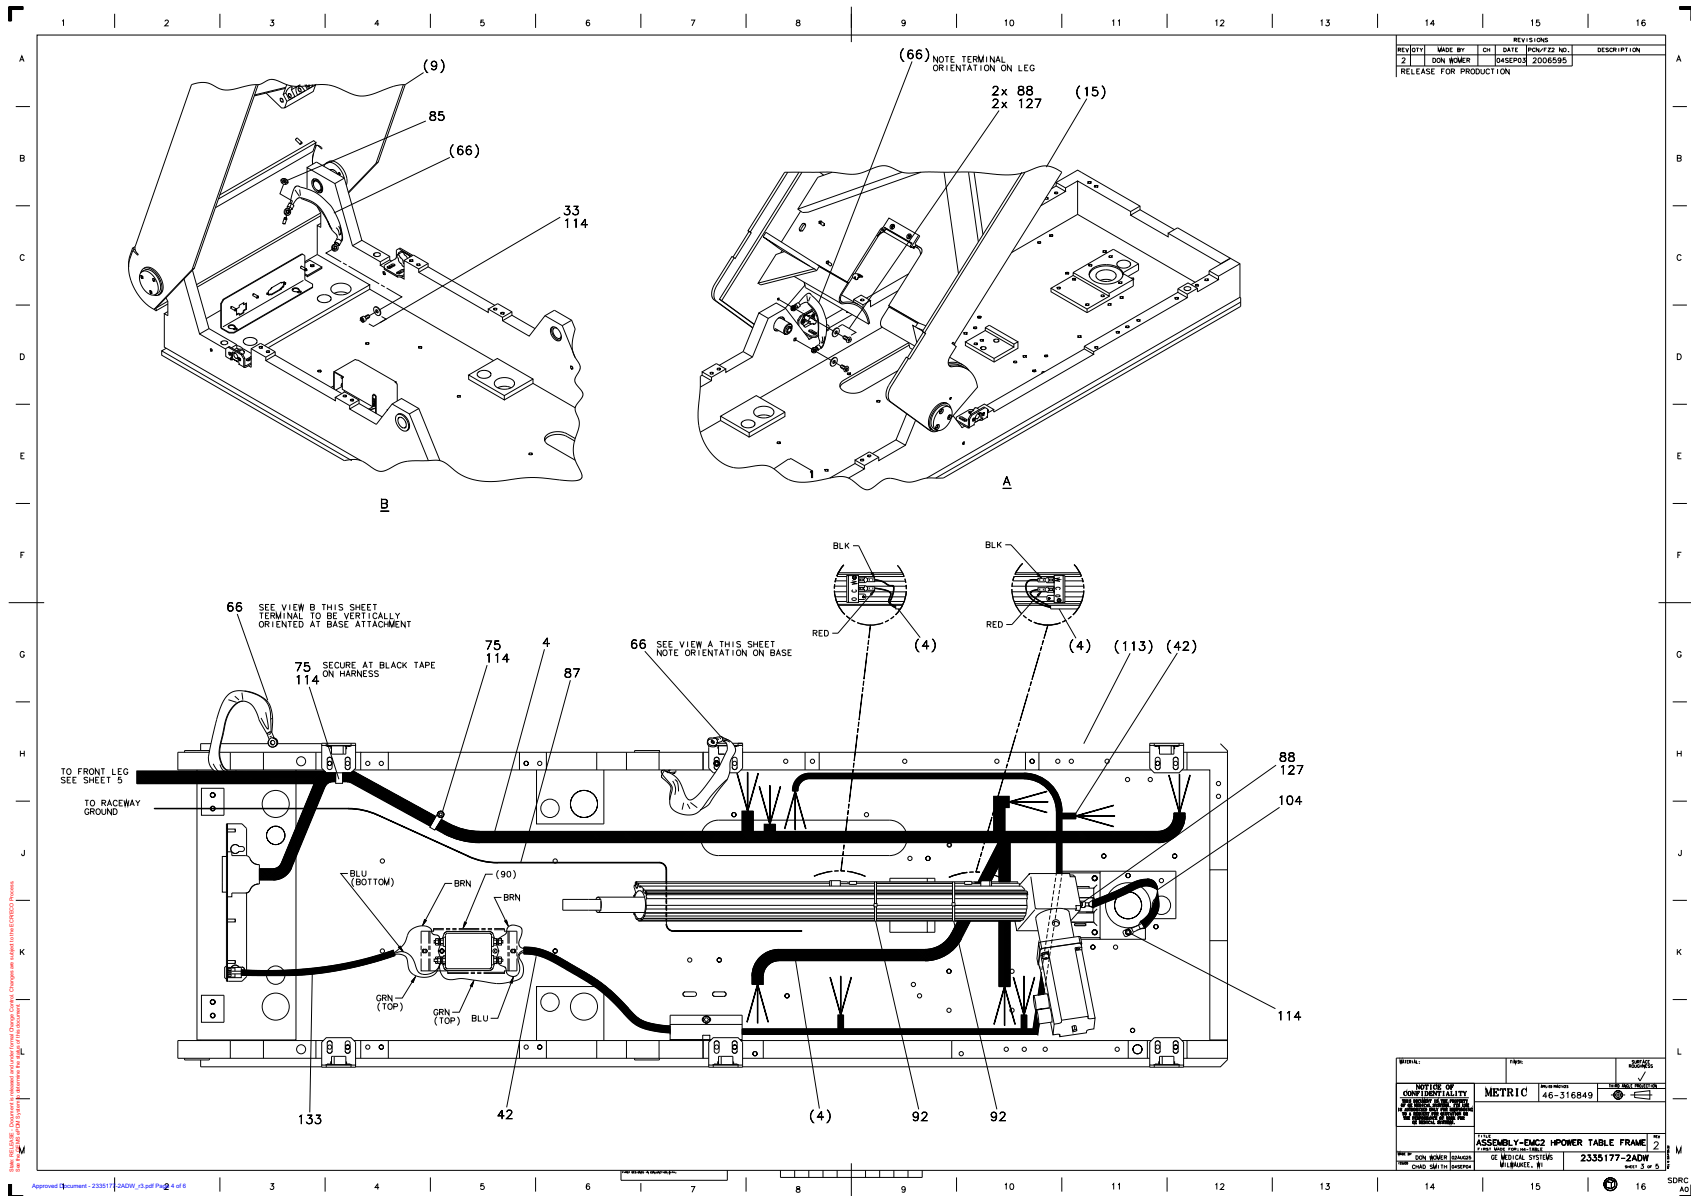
Table Frame Assembly (2335177-2 sheet 3, rev 2)
